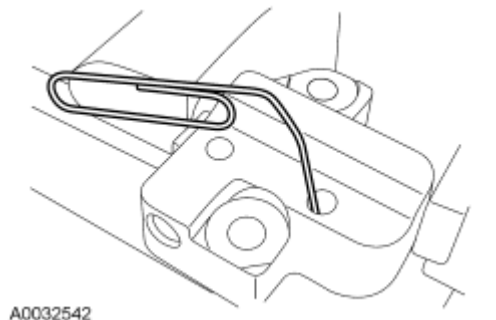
Installing Paper Clip Into Hole In Tensioner Housing To Hold Ratchet Assembly And Plunger
